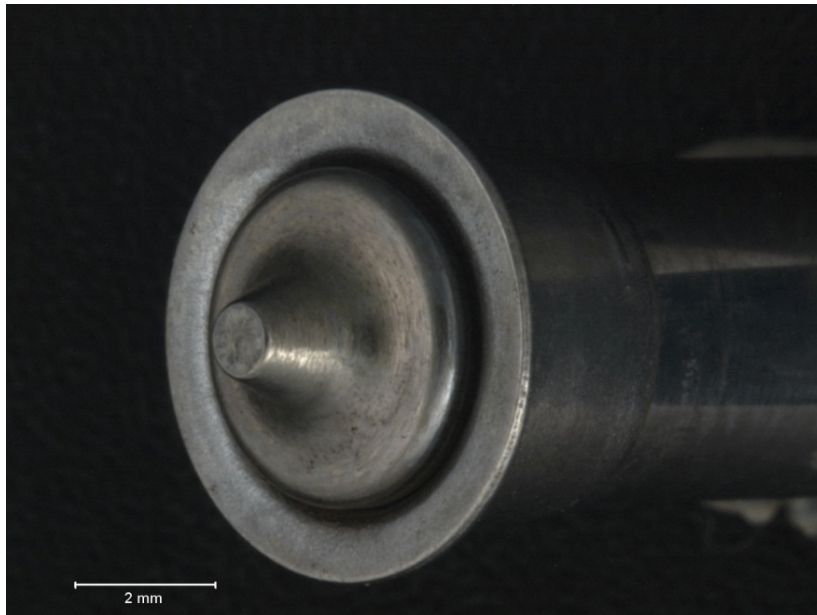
AF8646 ATJ/JP-8 Blend, Lower Hydraulic Coupler Piston
